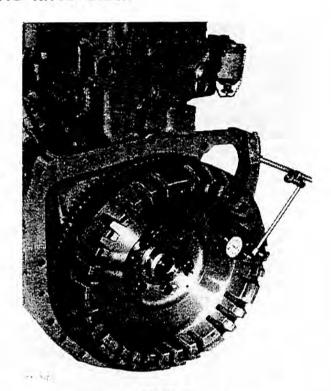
CHECKING FLYWHEEL FOR RUN-OUT
